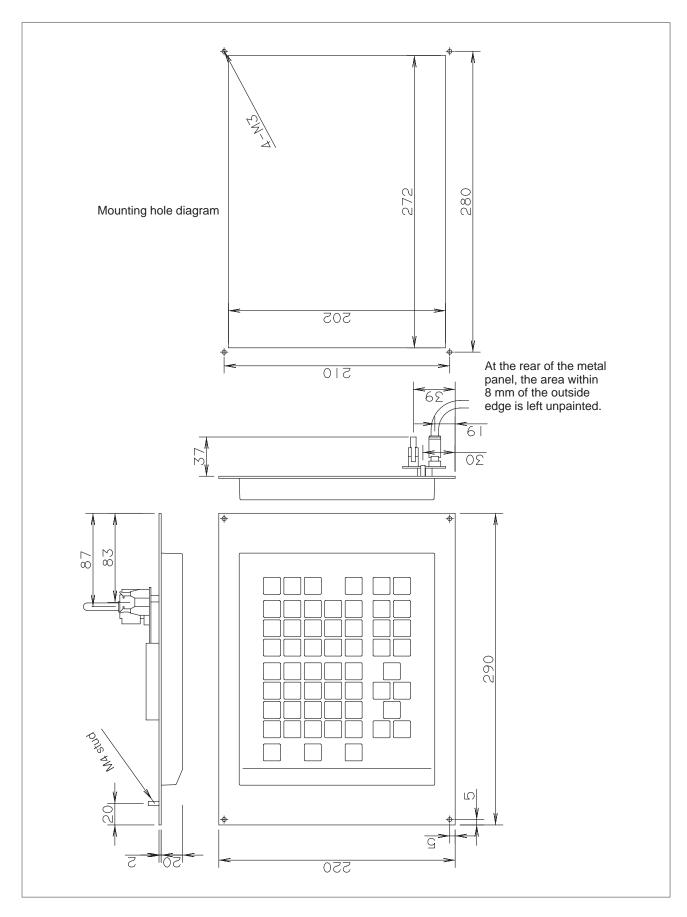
(b) External dimensions of separate-type standard MDI unit (vertical type) for 210i
